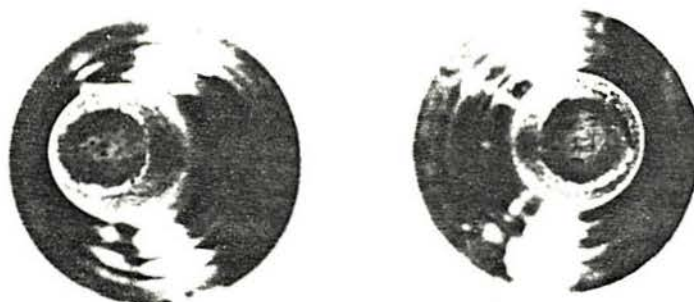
(b) 'Cup' and 'Cone' Fracture Surfaces Macrophotograph. X 1.4
